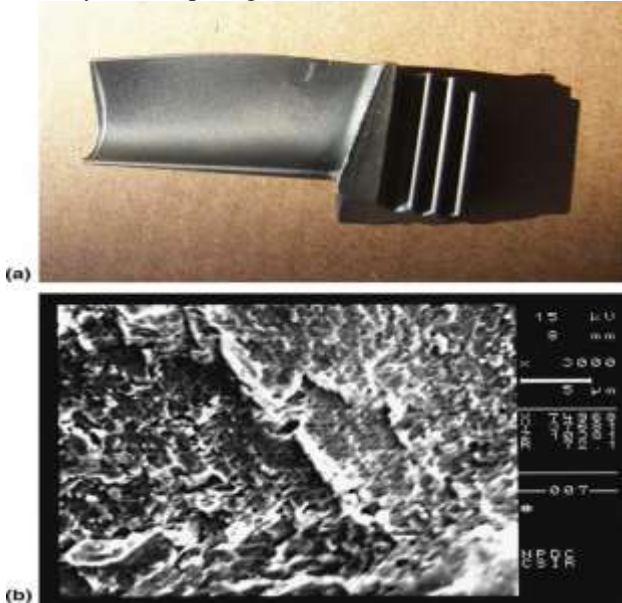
Fatigue cracking, initiating at metallurgical defect, found in trailing edge of blade to the right of the pencil mark, and SEM image of crack surface showing striations, confirming the fatigue mechanism.
